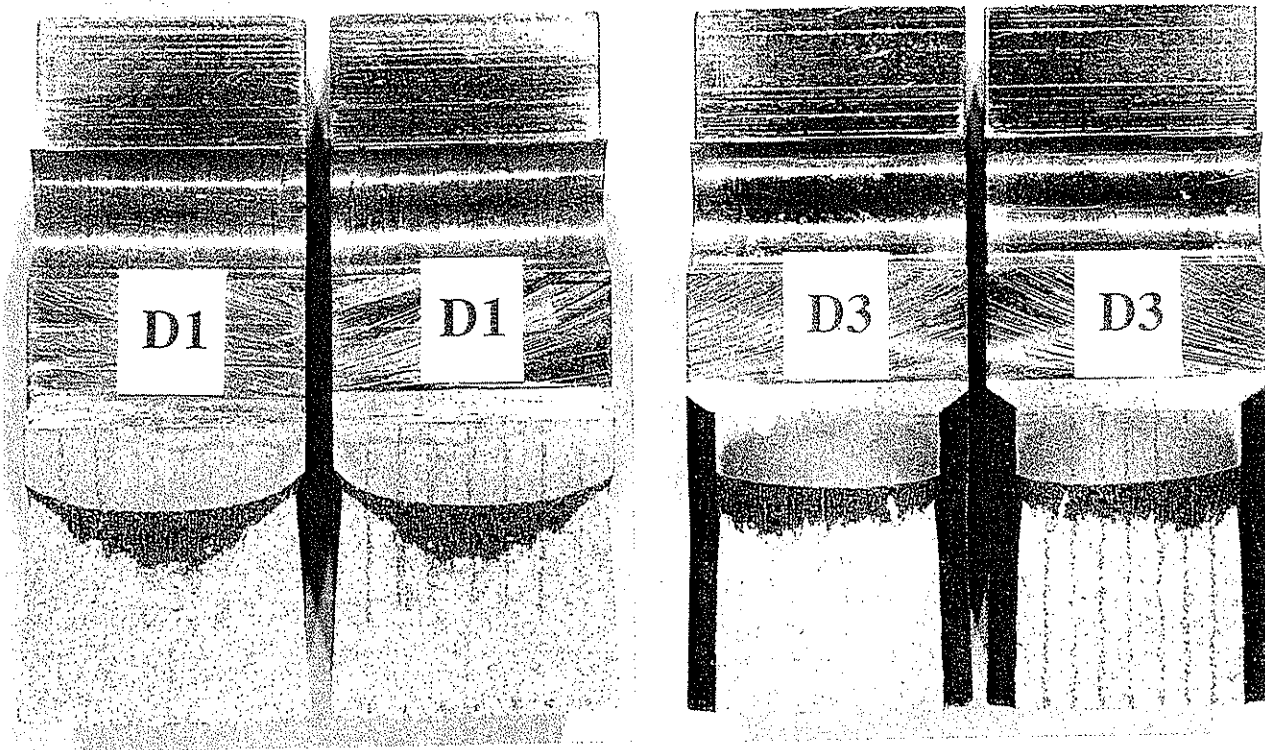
Typical CT Specimen Fracture Surfaces.
